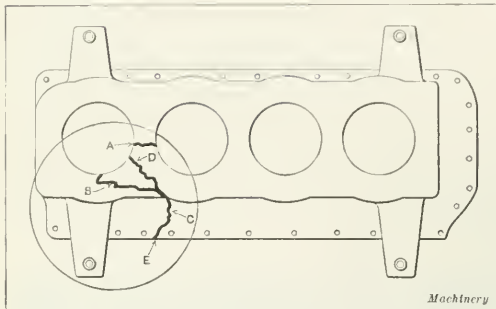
Diagram showing Method of welding Broken Aluminum Crank-case
